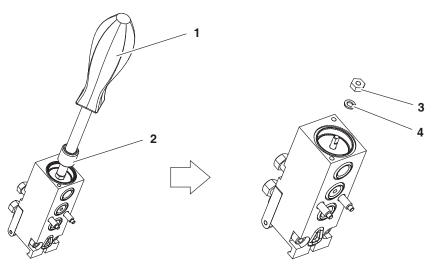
Using the stem wrench tool to remove the 5-40 nut and lock washer
